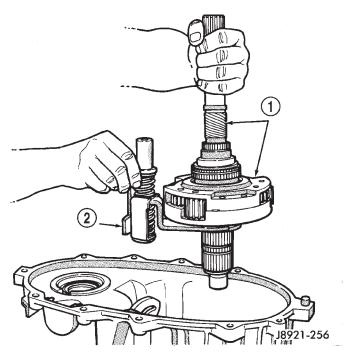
Assembled Mainshaft And Mode Fork Installation
